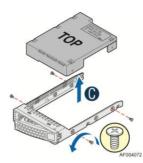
Installing Hard Disk Drive – Removing 3.5" HDD interface bracket
